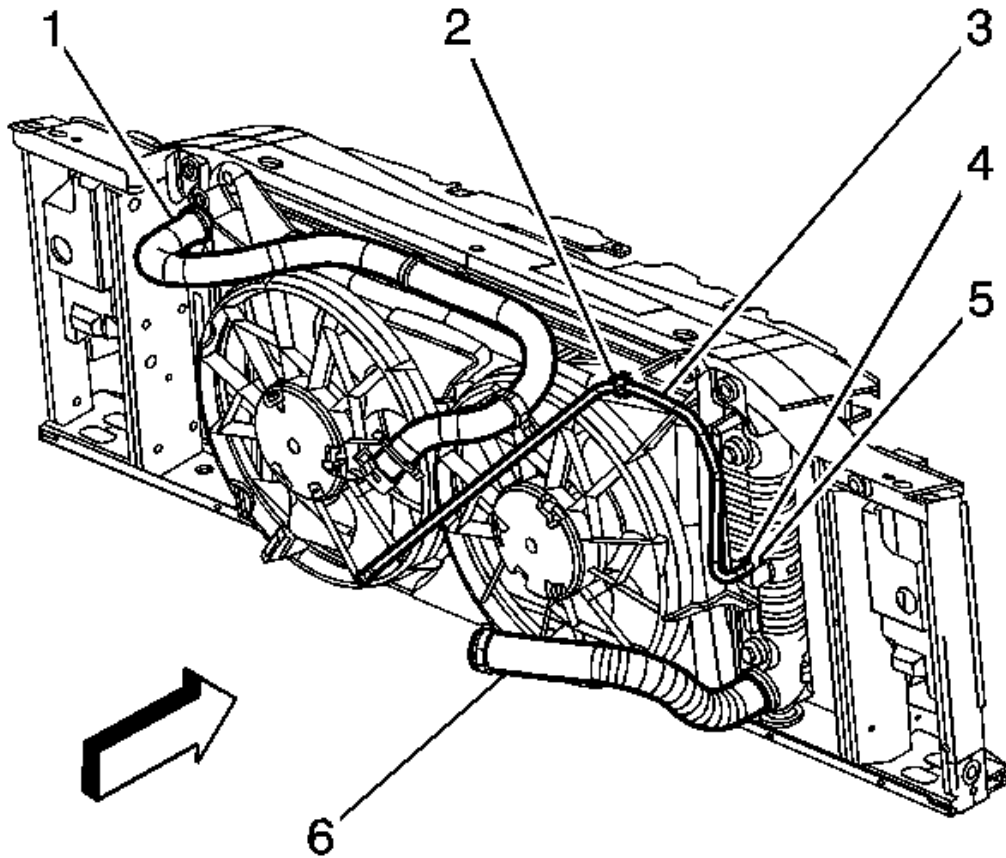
View Of Surge Tank Inlet Hose & Clamp
